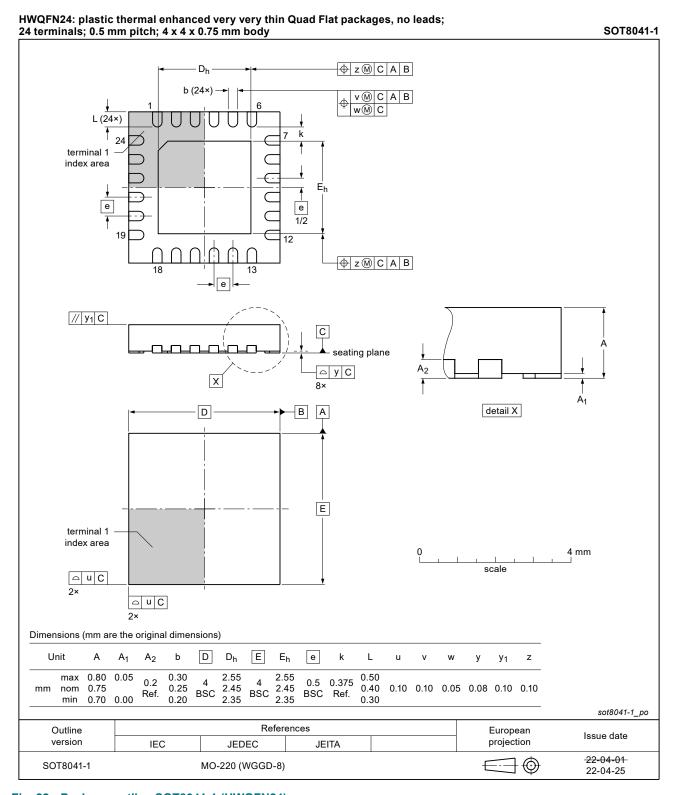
Package outline SOT8041-1 (HWQFN24)
